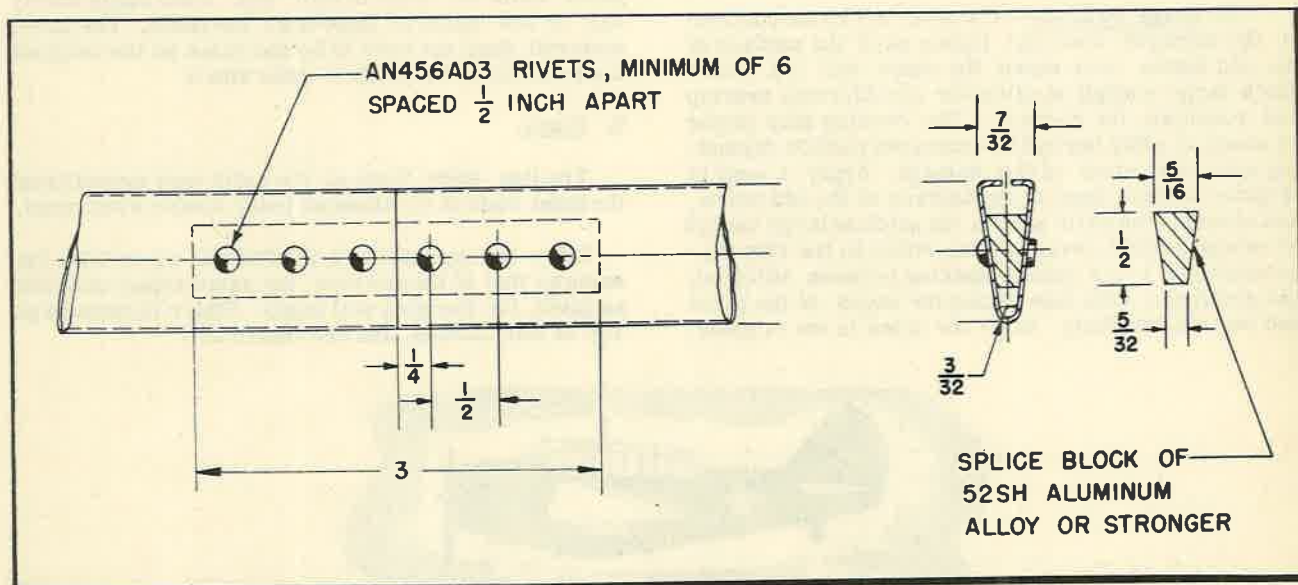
Repair of Aileron, Flap and Elevator Trailing Edge Section
